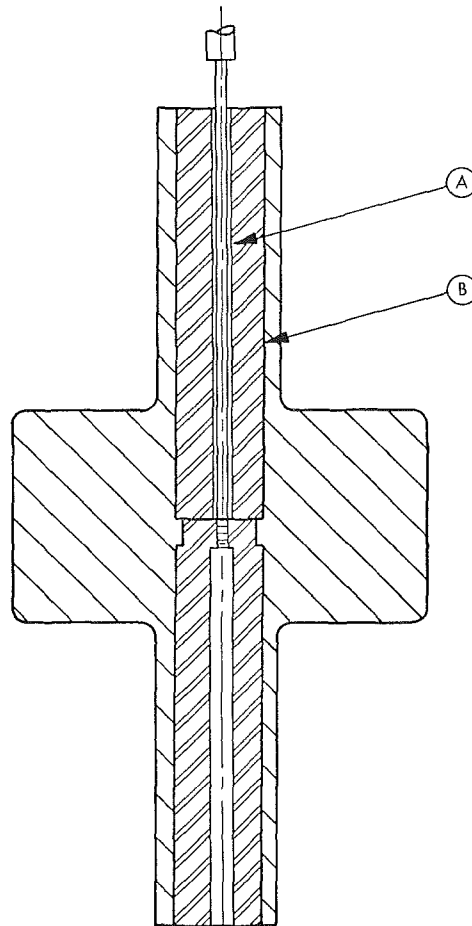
Cross section of test rotor showing flexible drive shaft connection
